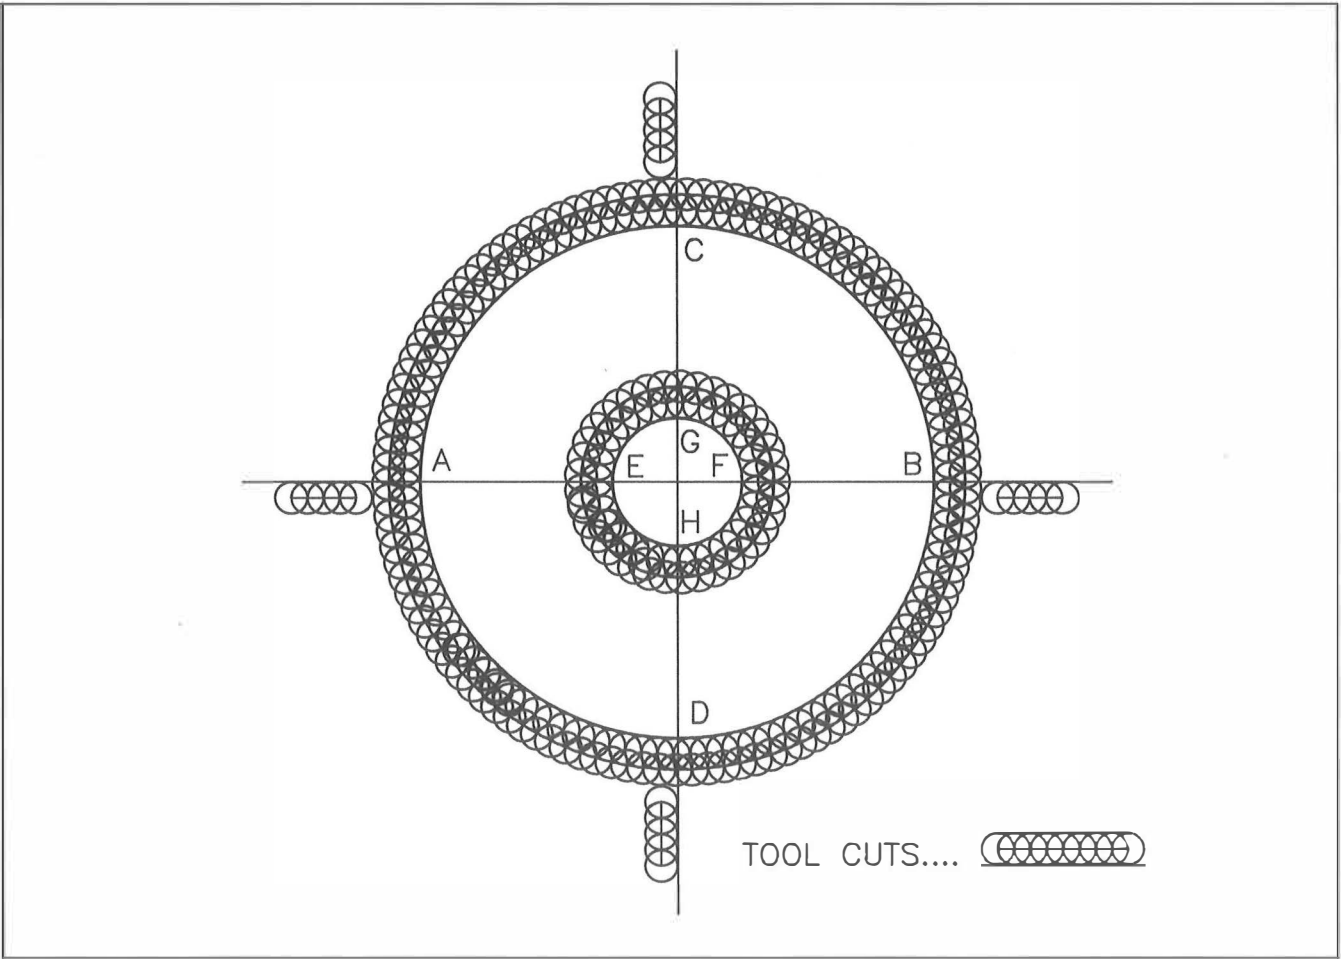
Drawing showing accuracy cuts in specified raw material and measurement points for both the 2-inch and 8-inch circles.
